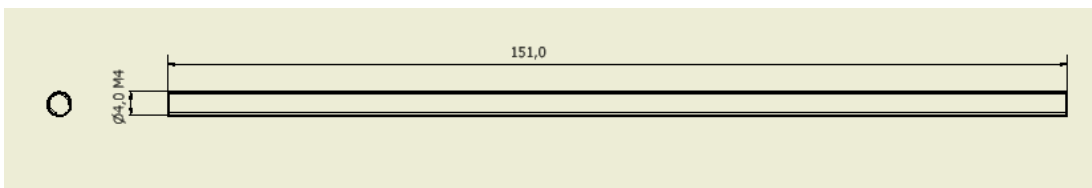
Drawing of the ion optics mounting rods used to hold the electrodes together on a concentric axis.
